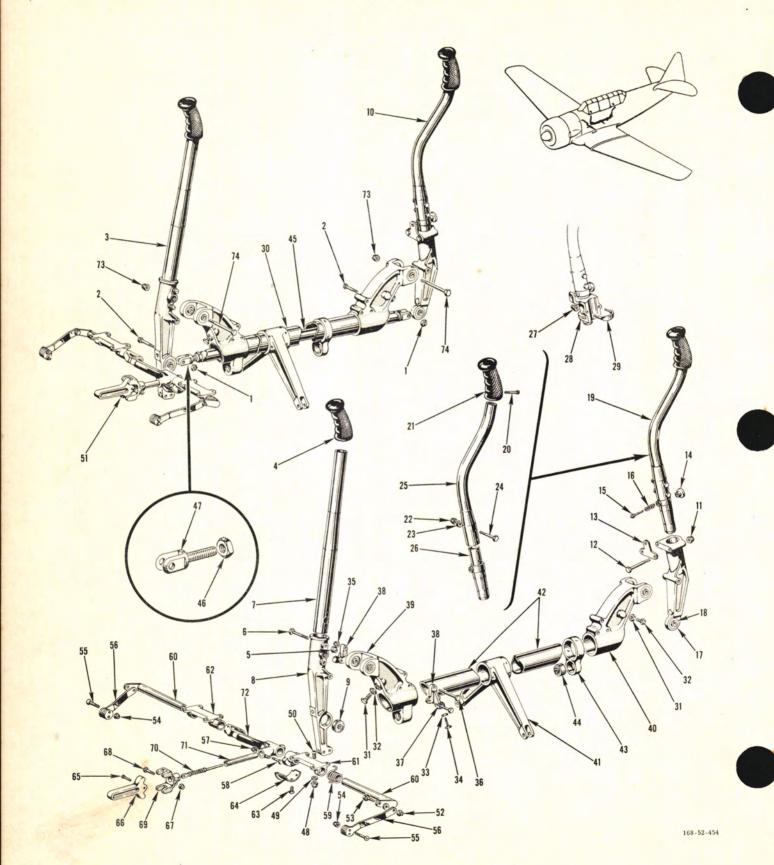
CONTROL STICK AND LOCK ASSEMBLY
